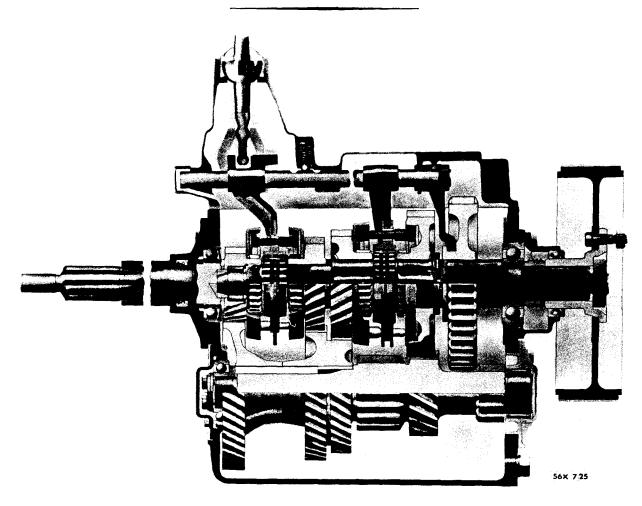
5-Speed Transmission Model 540 (Sectional View)
